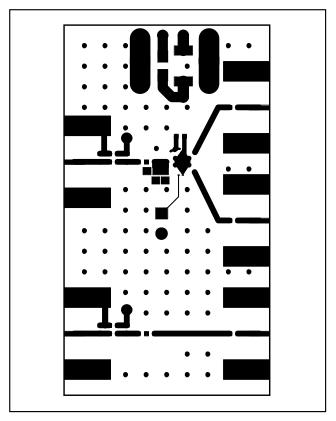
MAX3277 EV Kit PC Board Layout—Component Side
